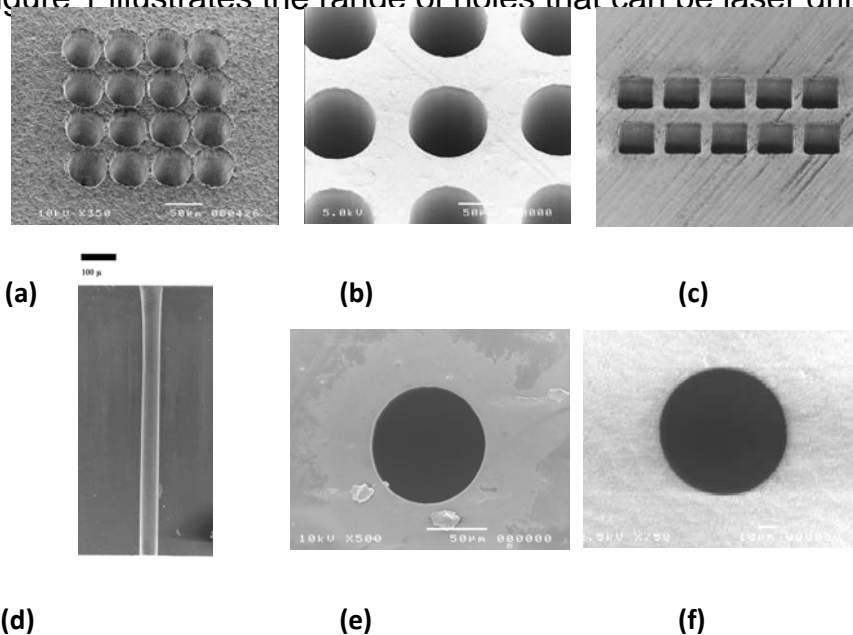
(a) 2 mil dia hole in alumina, (b) 4 mil diameter hole in polyimide, (c) 2.4 mil rectangular holes in SiN, (d) 2 mil dia hole cross-section in polyimide, (e) 3.2 mil dia hole in polyimide and (f) 3.2 mil dia hole in SiN
